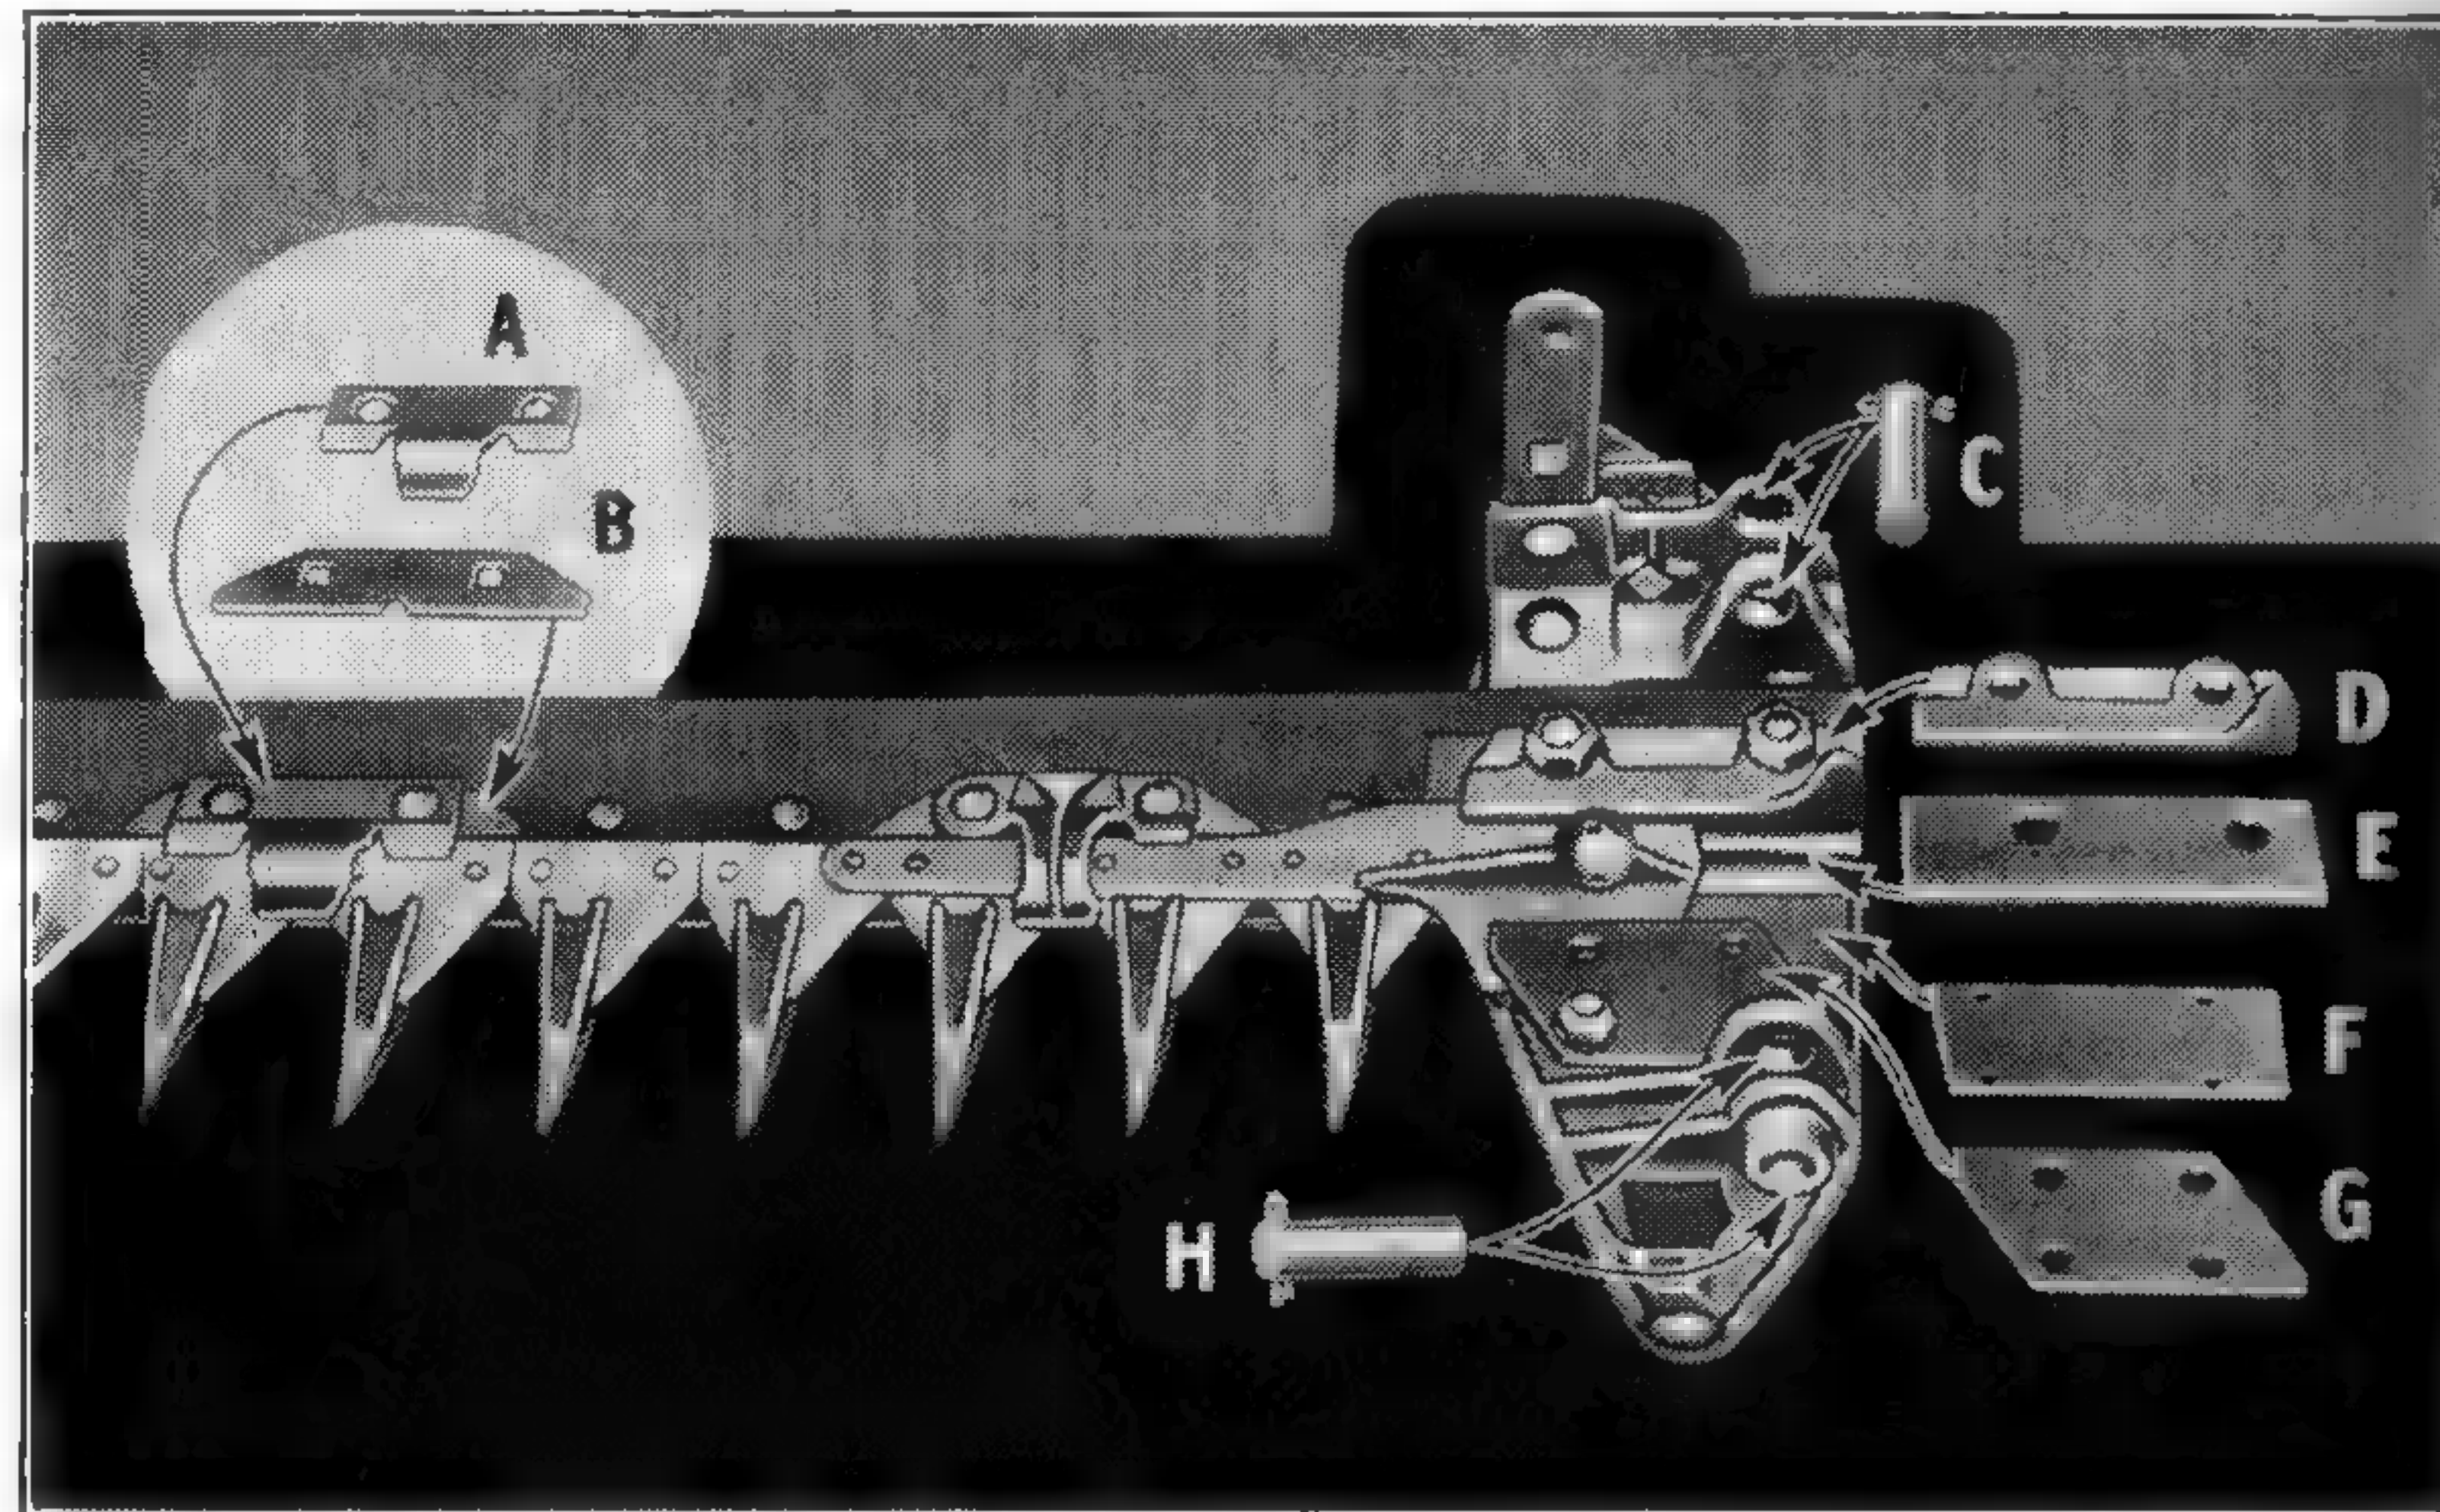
Section of the cutter bar and knife with knife head guides and shoe pins removed and arrowed to show their relation to the cutting parts and to show their long-lived construction. "A" shows knife clip. "B" shows knife wearing plate. "C" and "H" show heavy shoe pins. "D," "E," "F," and "G" show knife head wearing plates.
